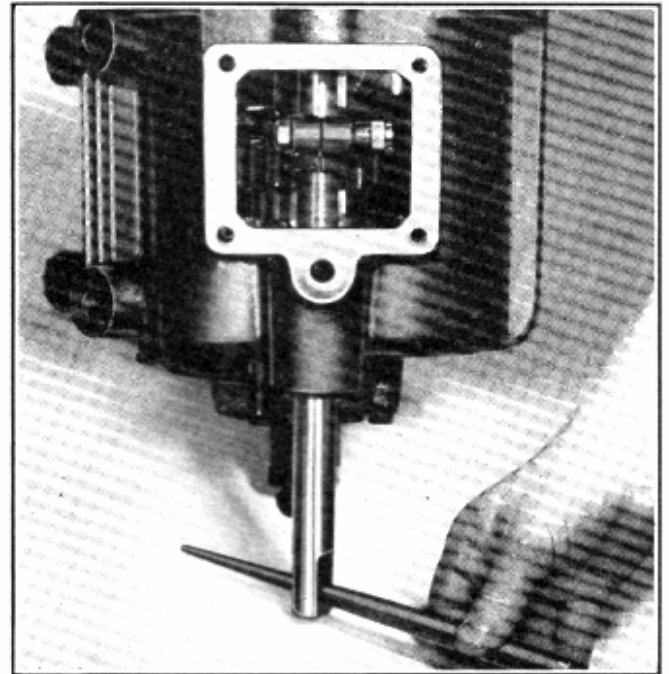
High and Low Speed Shifter Shaft is Threaded into Shift Fork as Shown
